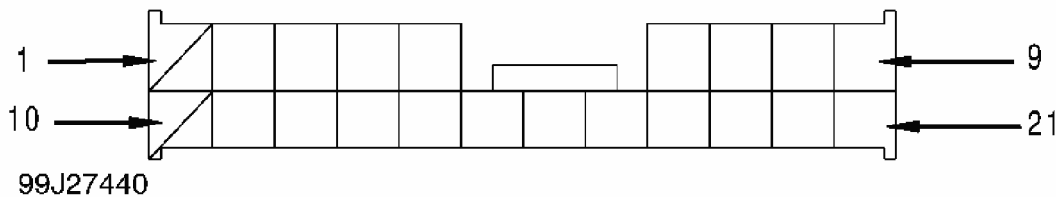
Identifying Instrument Panel Harness 21-pin Connector C505 Terminals
